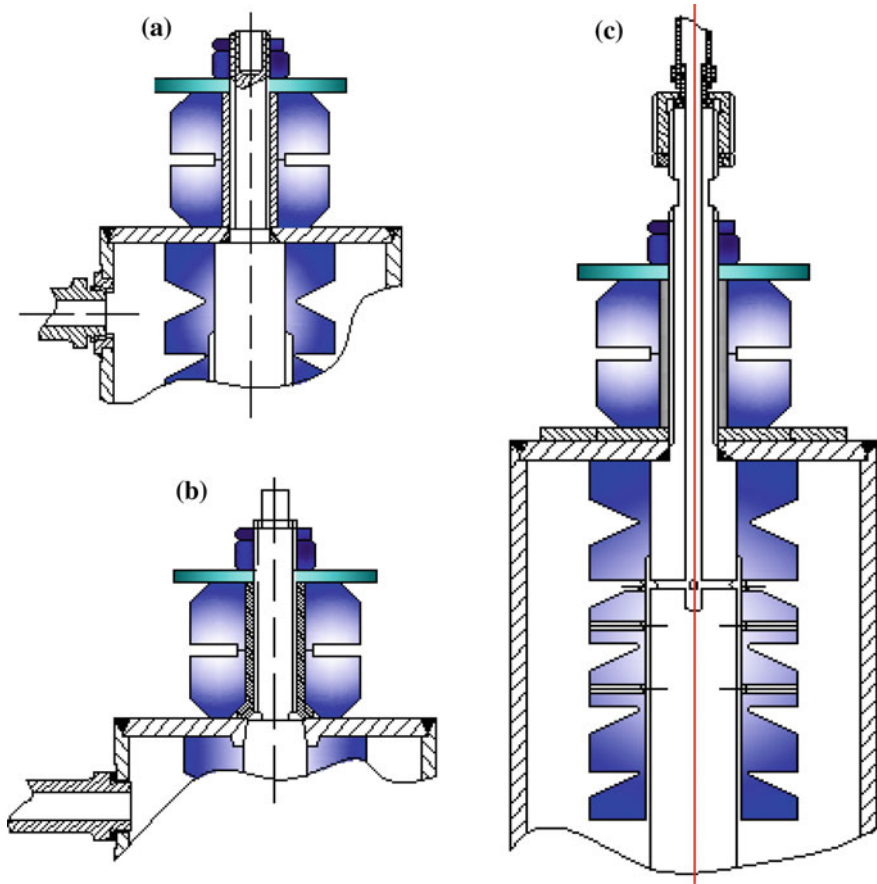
Other sealing and filling solutions. a Sealing when the rod shoulder is enough. b Sealing by conical fit. c Filler rod solution
